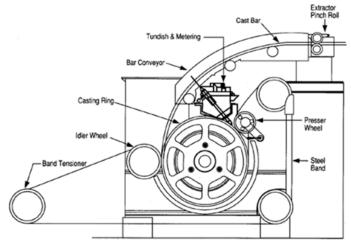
Schematic diagram of casting wheel, SCR technology of Southwire Company for producing copper rod.
